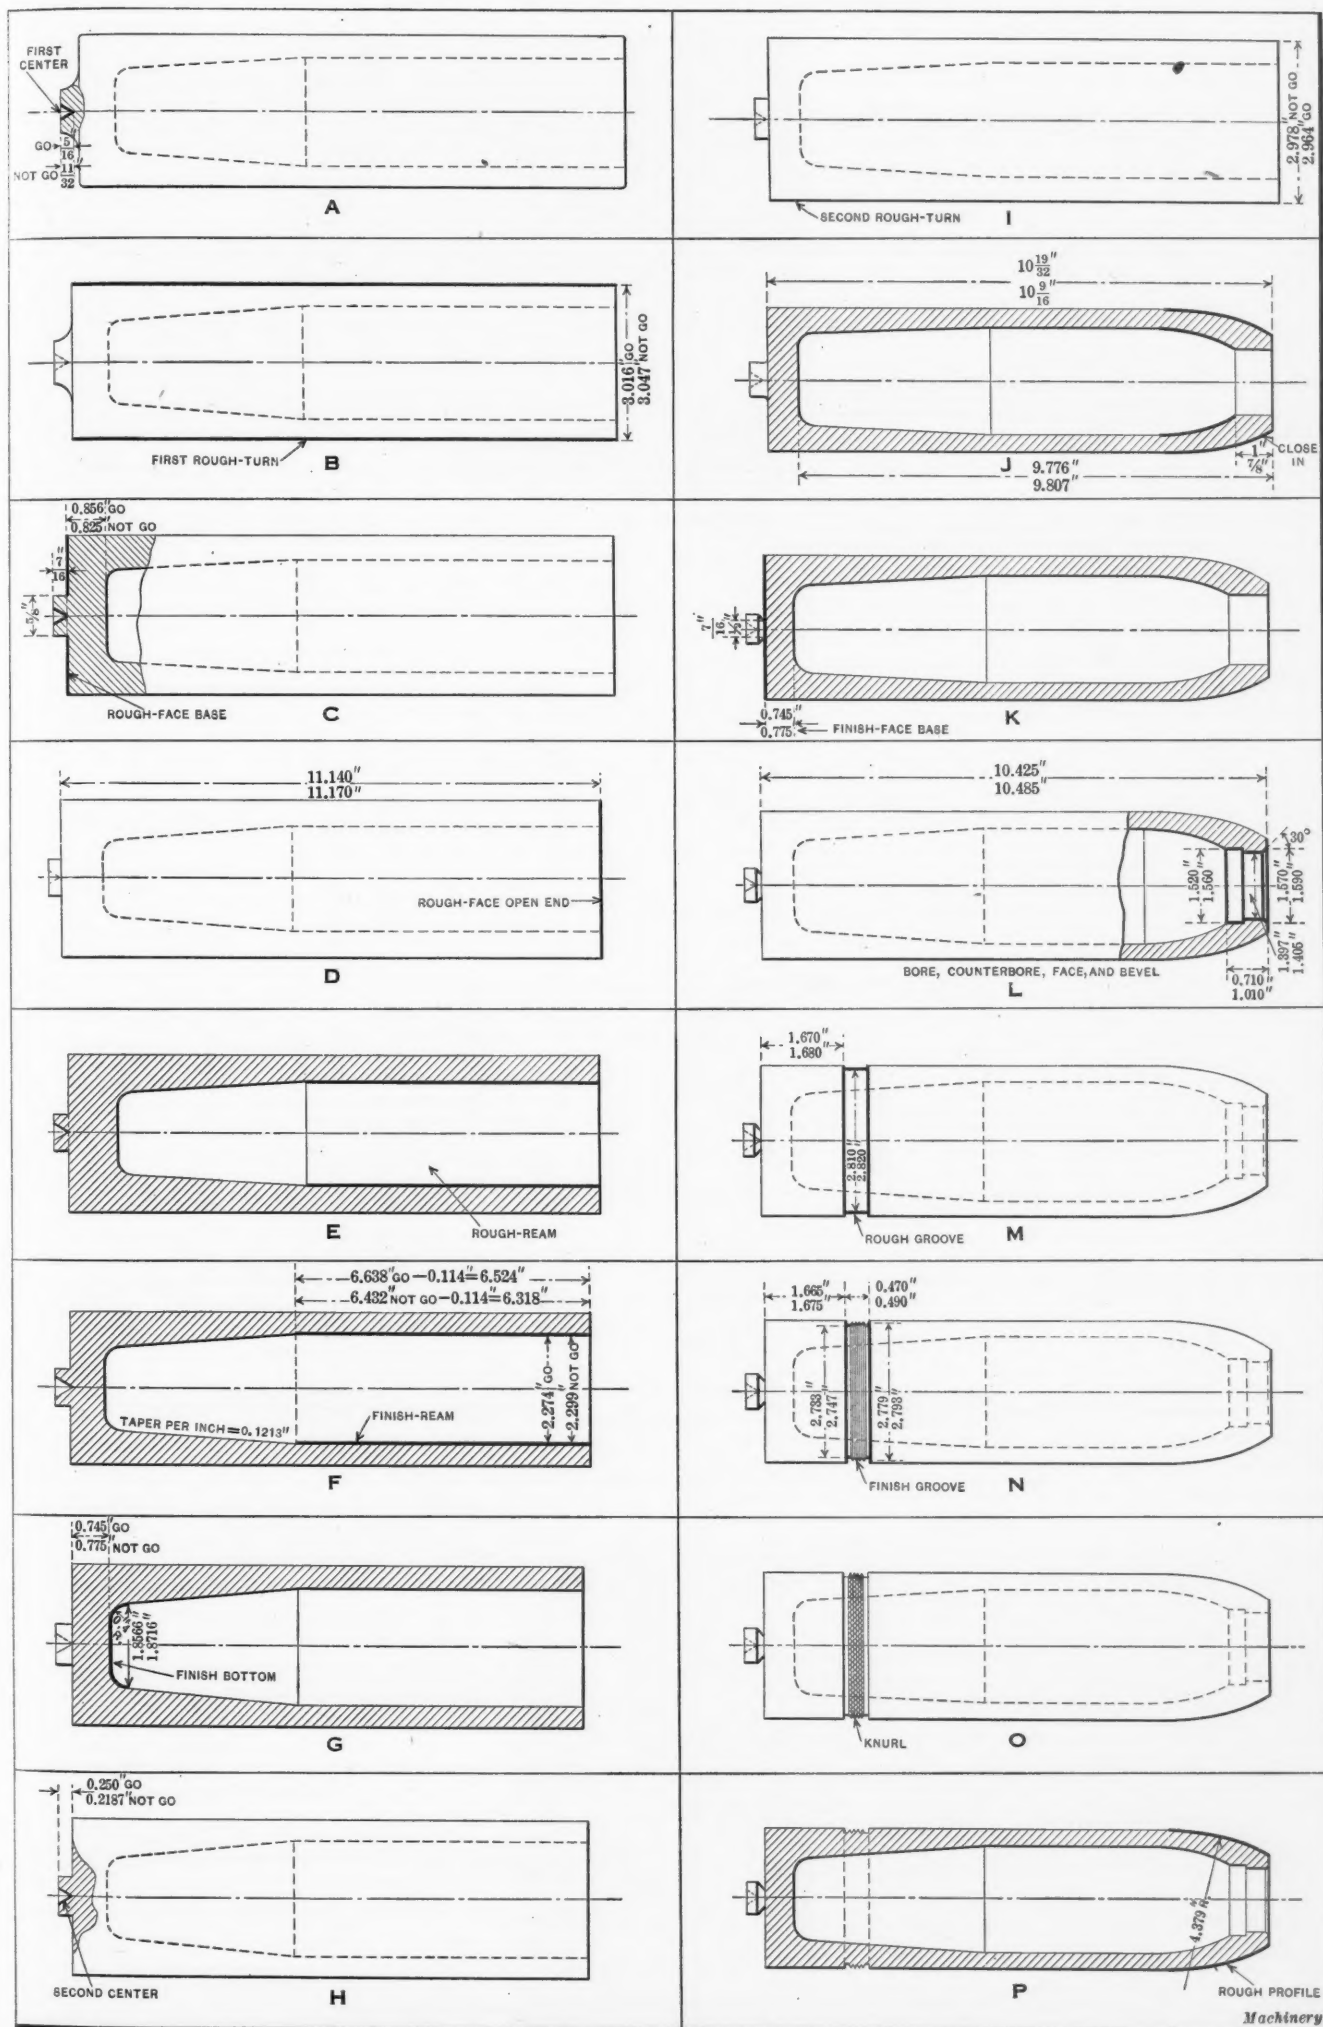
Sequence of Machining Operations on United States 75-millimeter Shell
